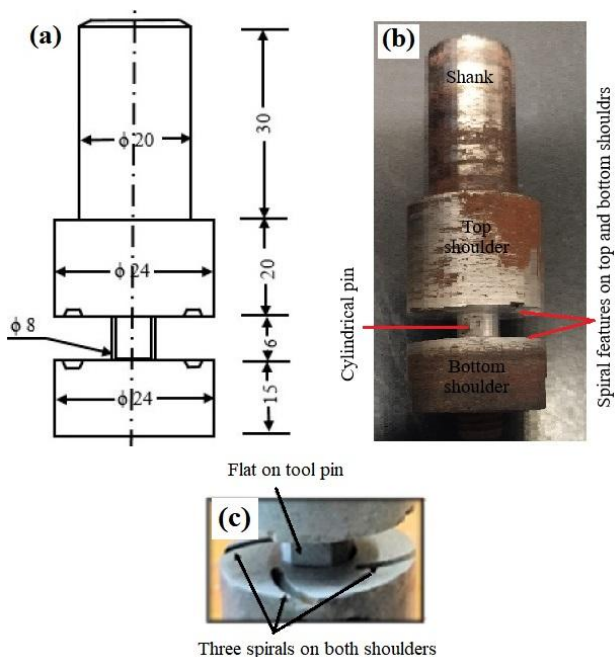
Tool-4, (a) 2D sketch, (b) Actual, (c) Spirals on shoulders [19], [37]
